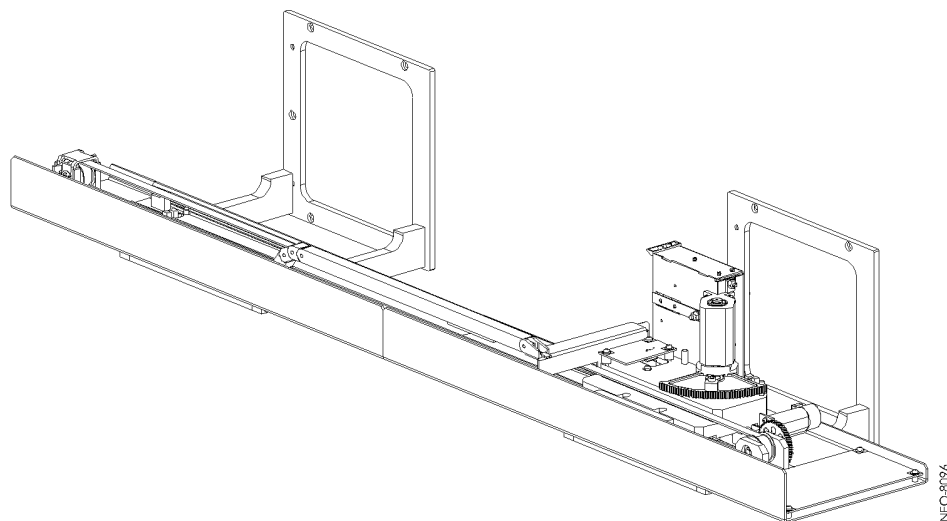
HRA Positioned Above the Mounting Bracket Assemblies
